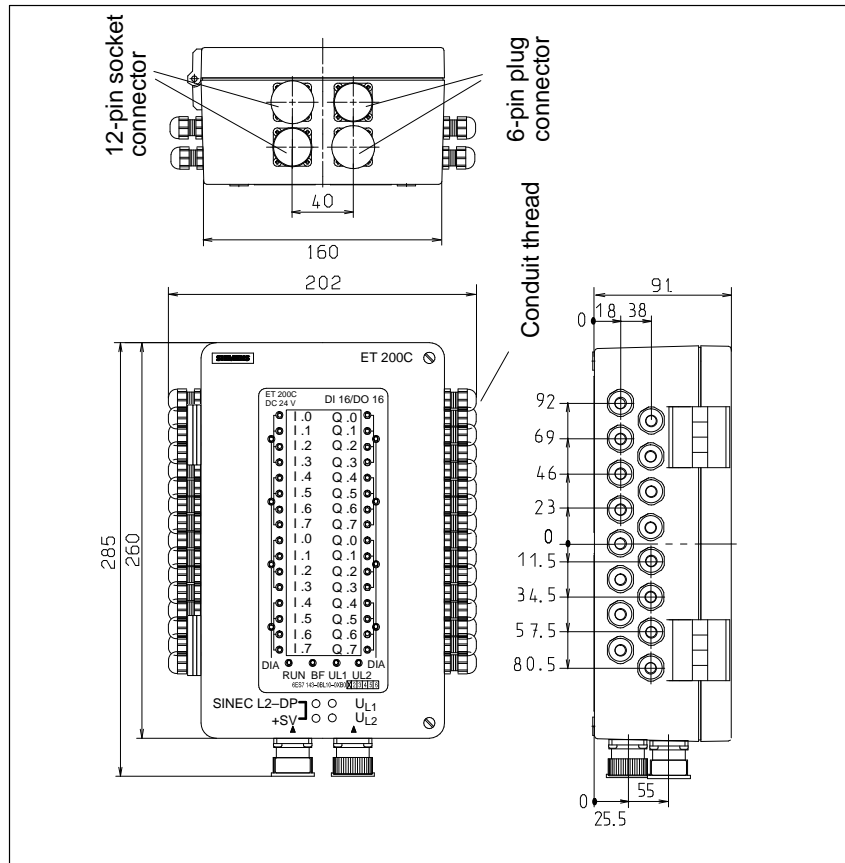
Digital Input/Output Module ET 200C; DI 16/DO 16 × DC 24 V/2A (6ES7 143-0BL10-0XB0); Dimension Drawing
